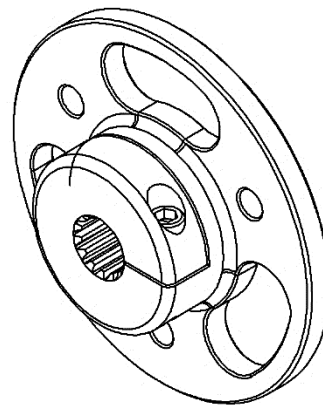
SUPER FLEX HUB (CROSS CLAMP)
